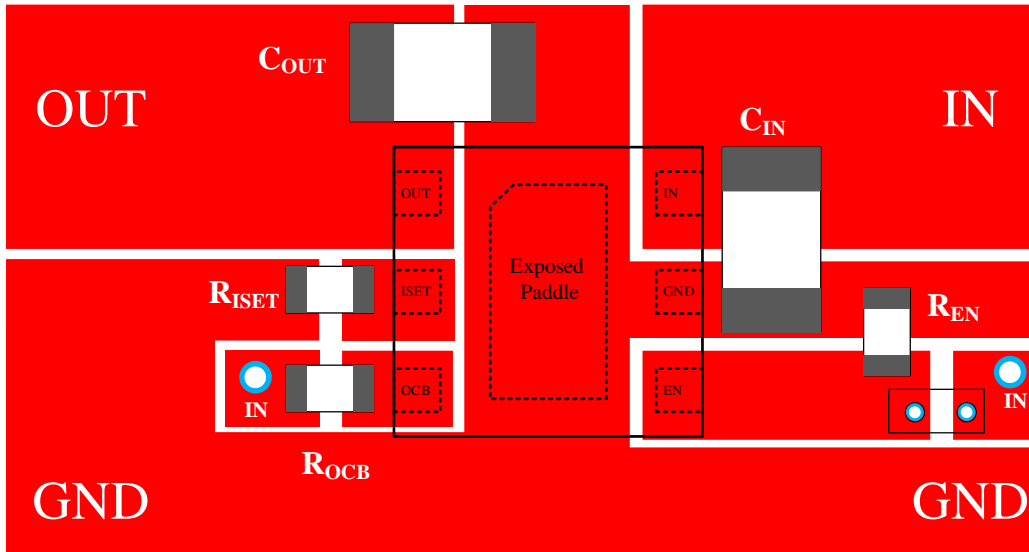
(a). PCB Layout Suggestion (SQ24201E1DED)
